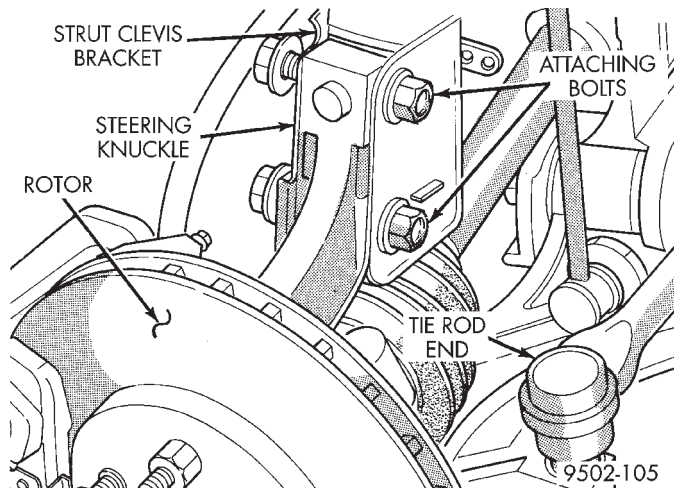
Clevis Bracket To Steering Knuckle Attaching Bolts
